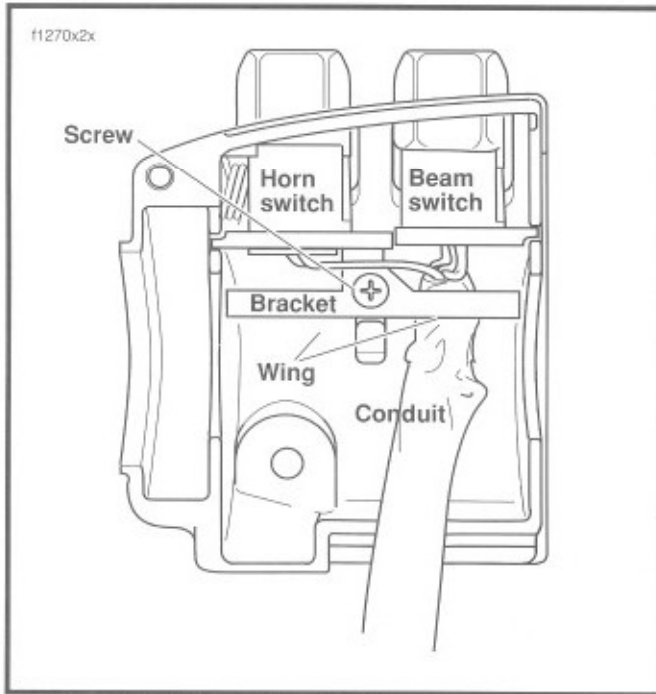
Upper Left Handlebar Switch Housing (Without Splices)
